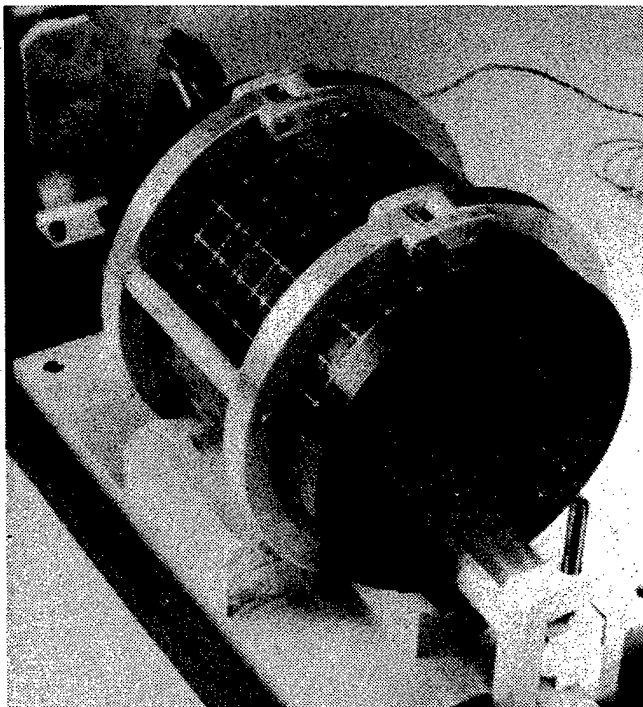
CYLINDRICAL CIRCUIT BOARD IN BONDING
